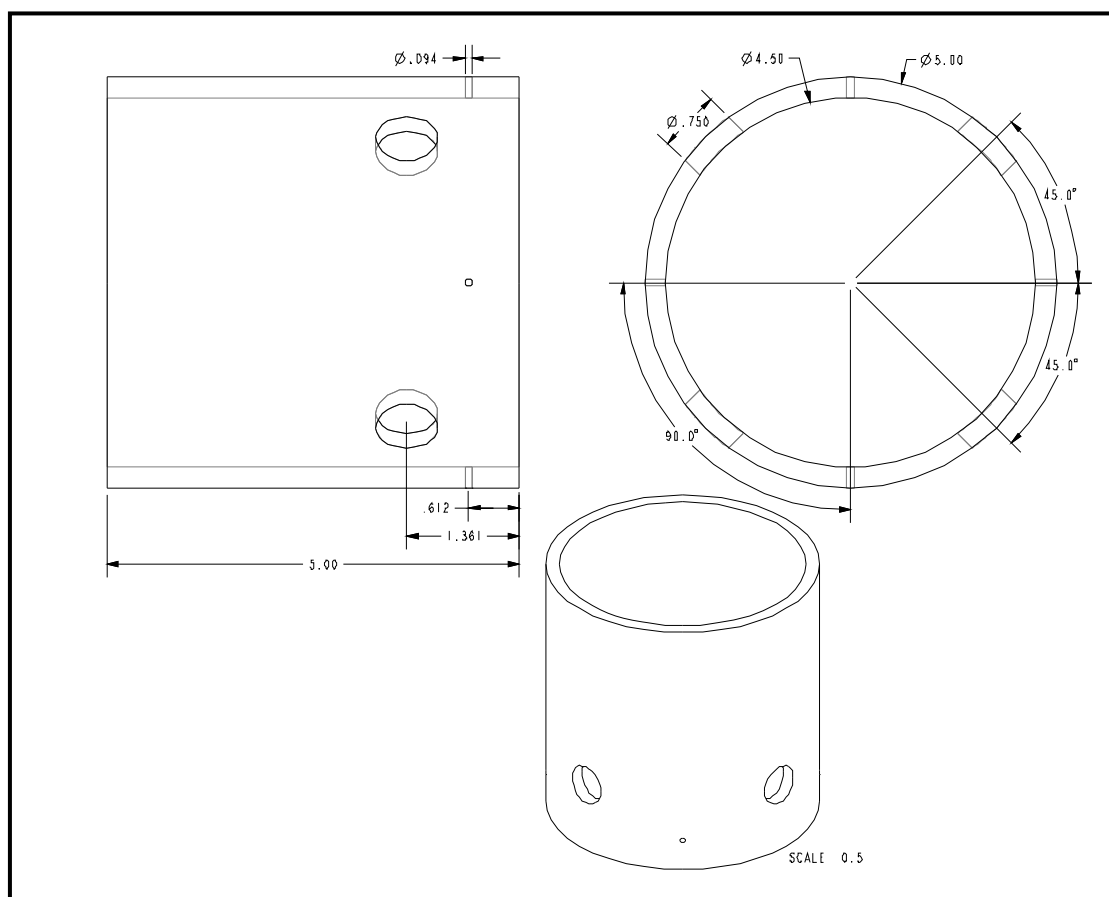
CAD Drawing of the Standard JSR Mold – Outer Shell (Material: Aluminum, Filename: standardshell.drw).
